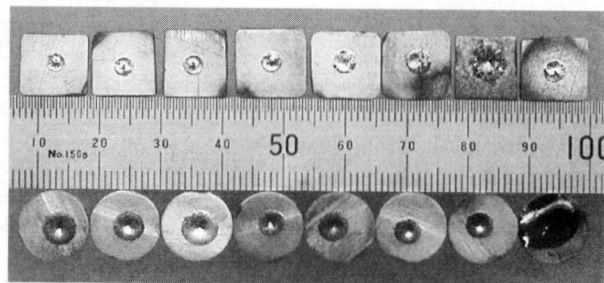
Macro photograph showing surface colouration due to atmospheric contamination in welded samples of CP G2 Ti (top) and Ti-6Al-4V (bottom). Post-weld shielding gas cut-off temperatures are (L to R) ambient conditions, 200, 300, 400, 500, 600, 700 and 900°C. Scale provided for reference shows units of millimetres
